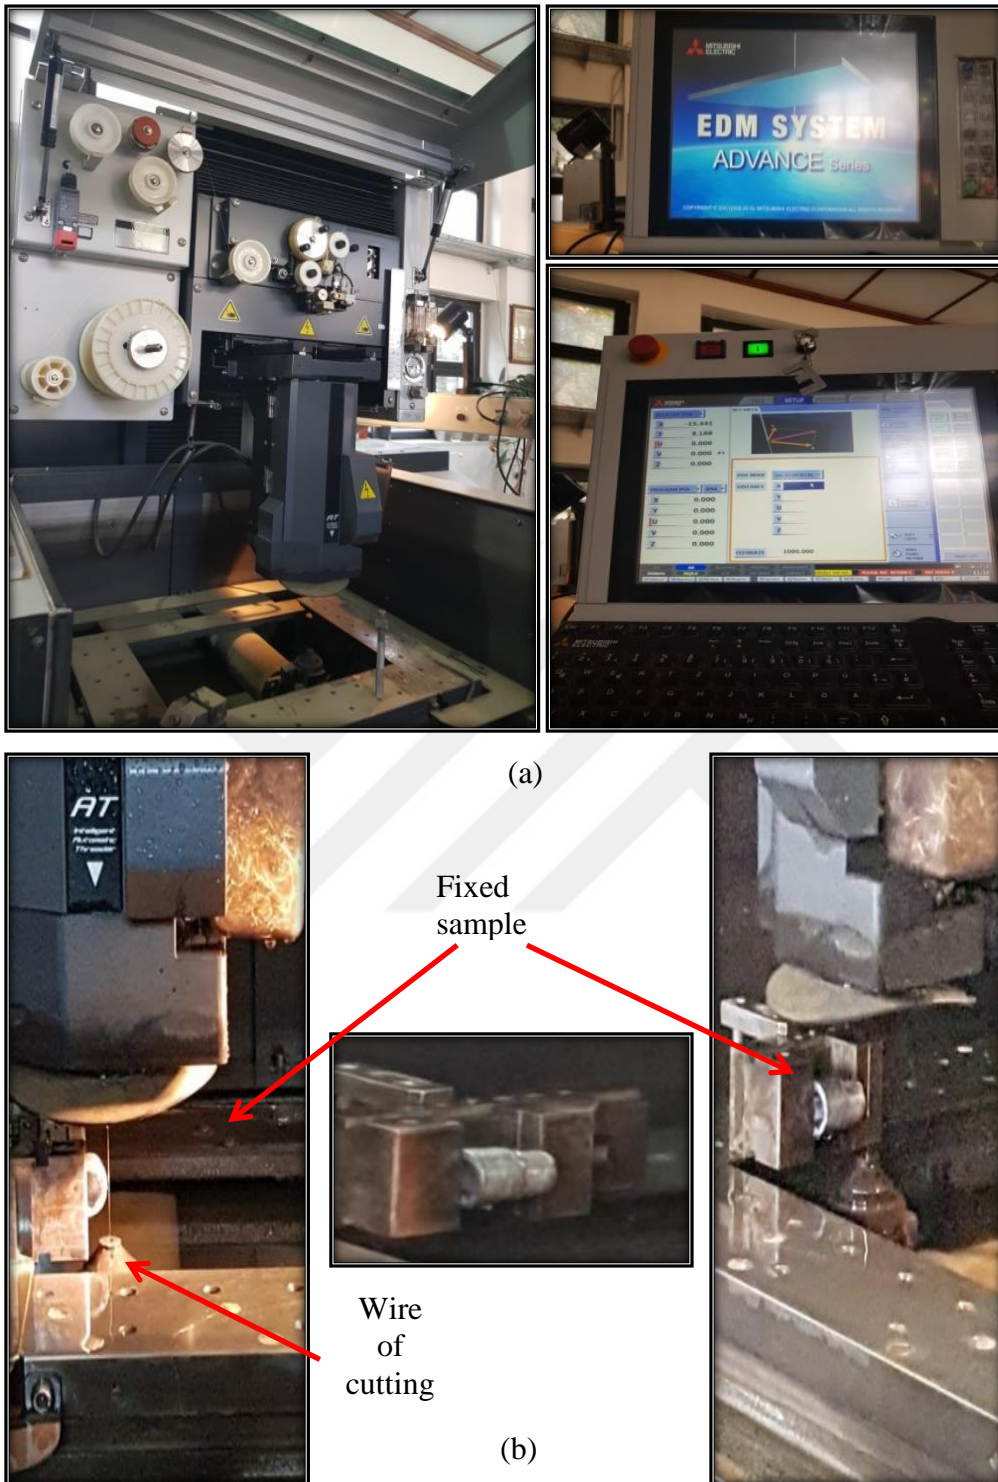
(a) EDM machine for samples cutting; (b) Sample fixing in EDM machine.
